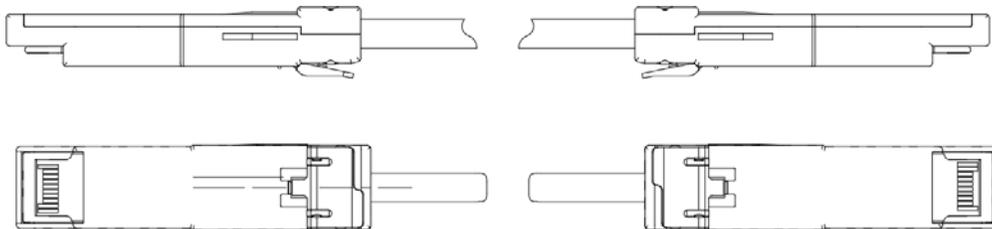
Representative Drawing of an SFP Passive Cable Assembly
